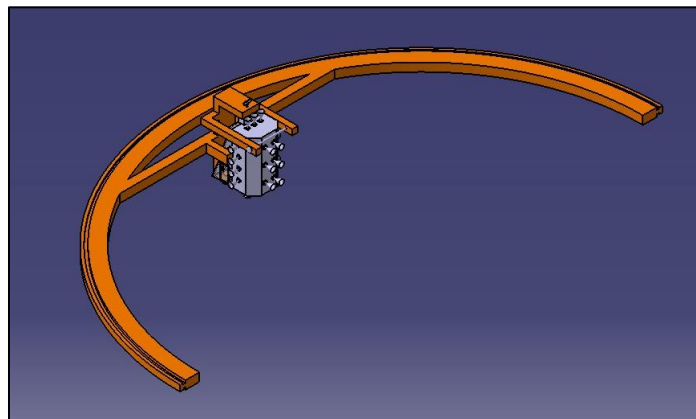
RCSs Clamped into Fixture with Pressure Plate
